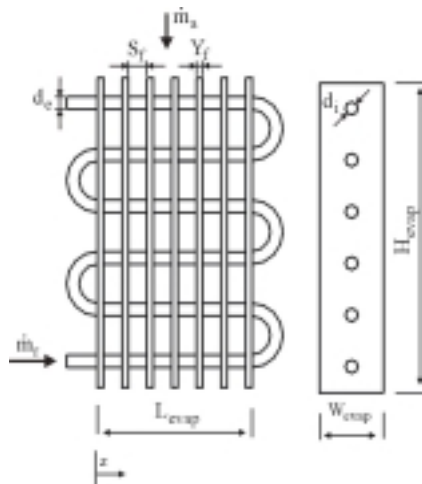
Schematic and geometrical parameters of a finned-tube coil evaporator.
